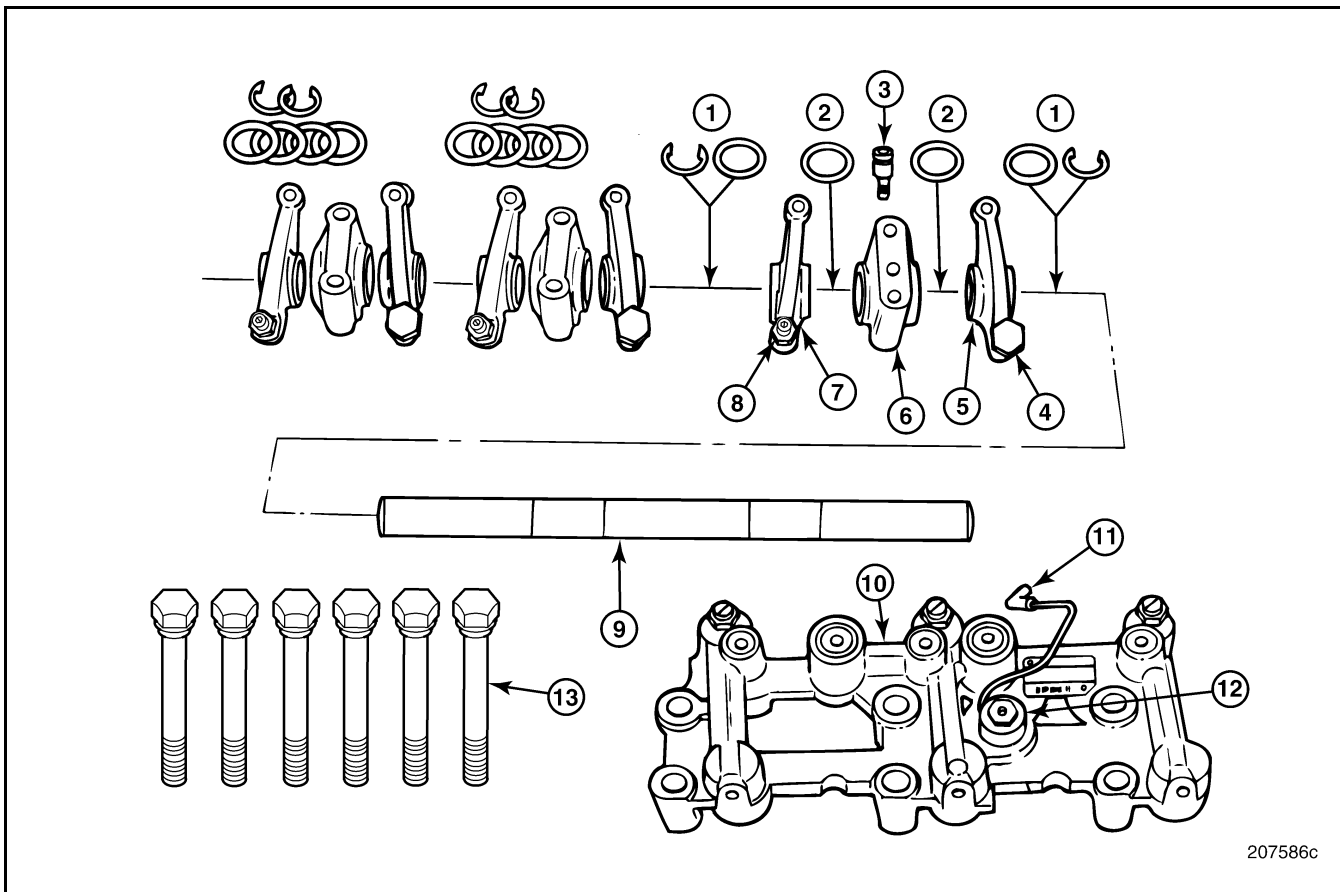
Valve Rocker Arm Shaft Assembly (with J-Tech™ Engine Brake)
